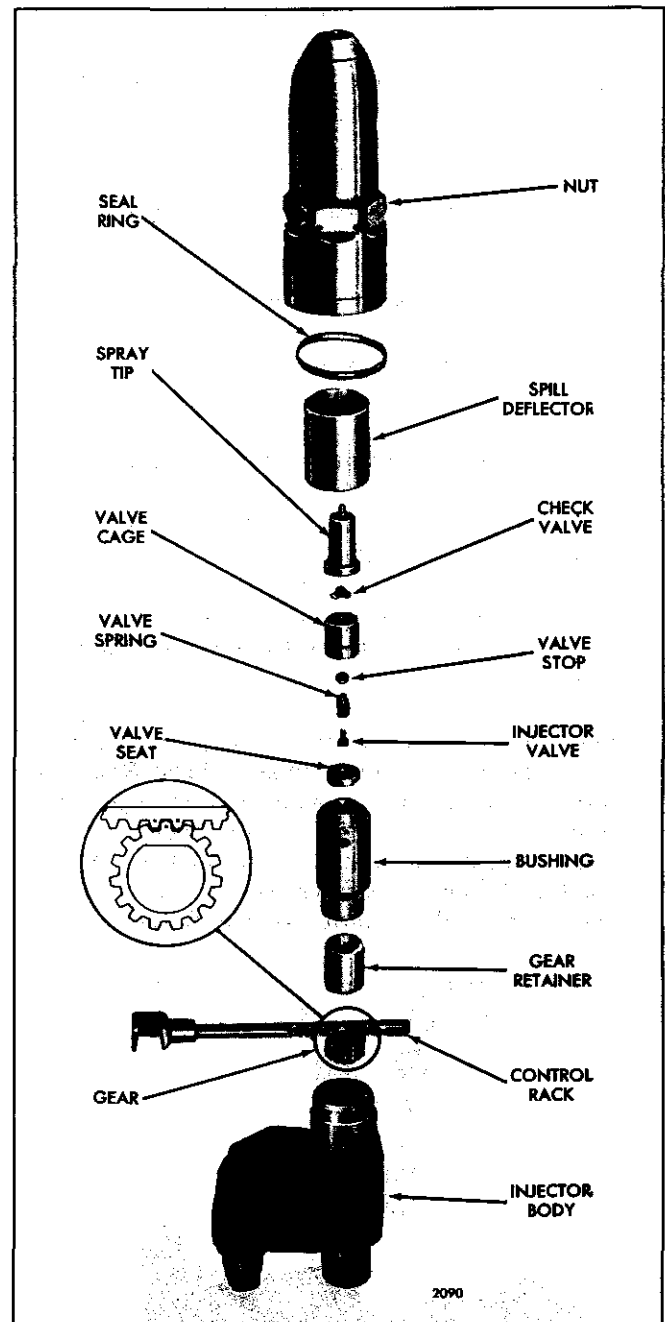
Injector Rack, Gear, Spray Tip and Valve Assembly Details and Relative Location of Parts
